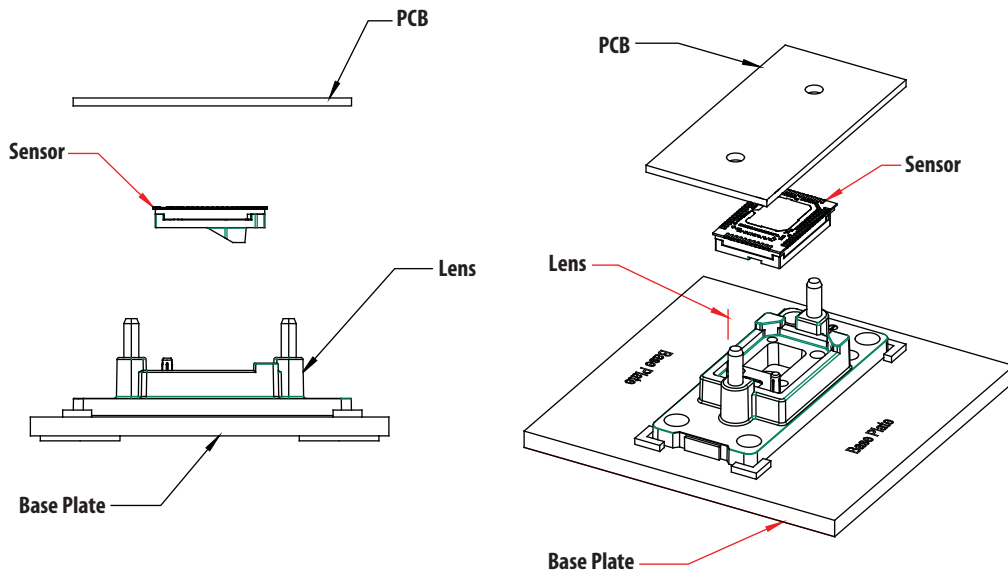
Exploded view drawing of ADNS-7630 sensor coupled with ADNS-7100-001 lens, PCB & base plate (front view and top side view)
